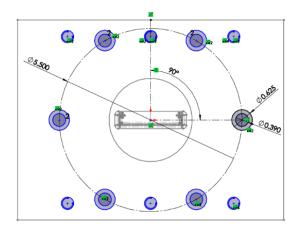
Counterbore and clearance holes on a rectangular transition plate.
